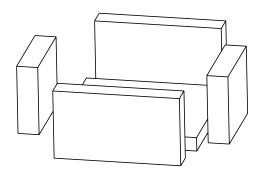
These are the bottom casting board and the four walls of our soon-to-be mold into which we will cast a burner block.
